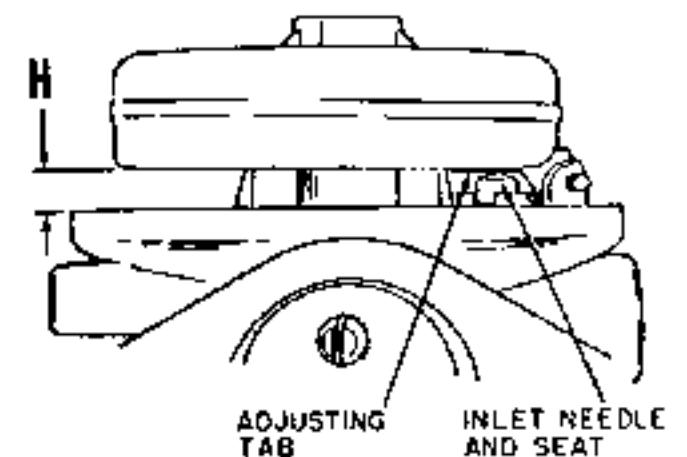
Float height (H) should be measured as shown on Walbro float carburetors. Bend adjusting tab to adjust height.
